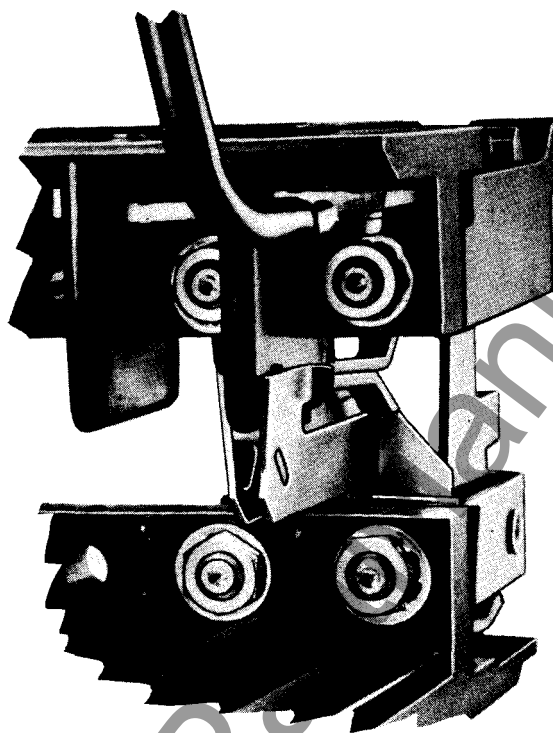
Auxiliary Short Circuiting Switch (Enlarged View)
